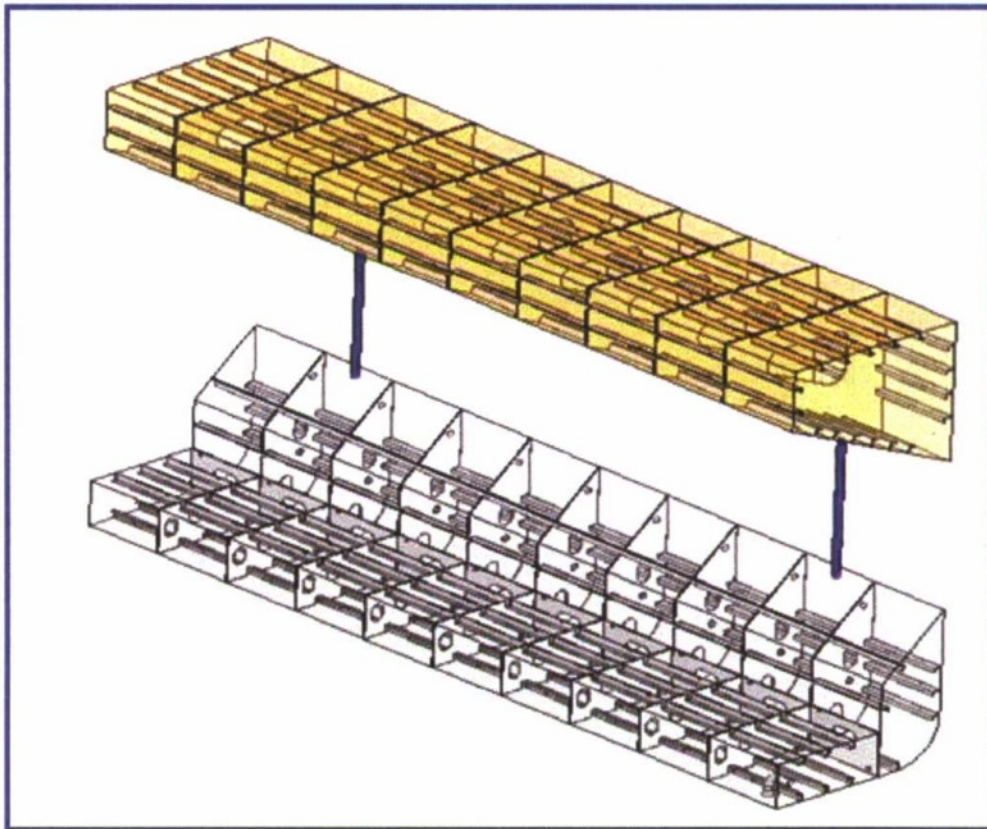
CAD model of full-scale ballast tank, including internal tank structure and connection pipes.
